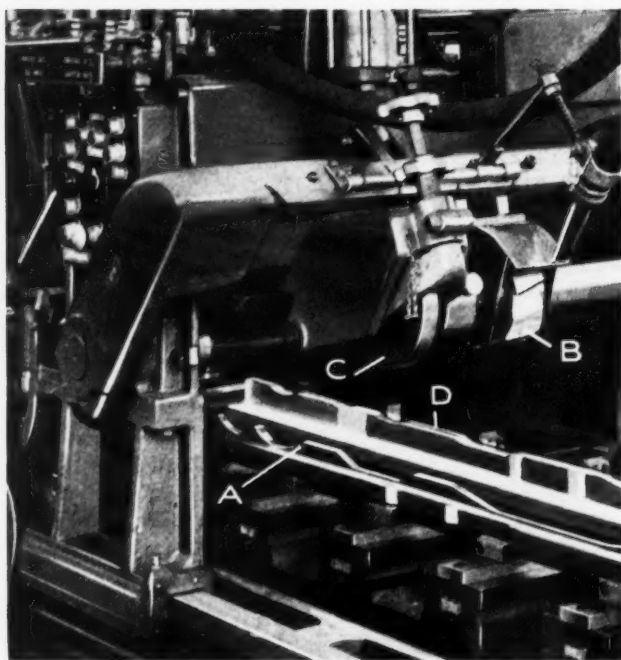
Horizontal Spindle of Machine Shown in Fig. 1 with Templet A and Follower C Arranged for Milling Work D to Required Shape with Cutter B
